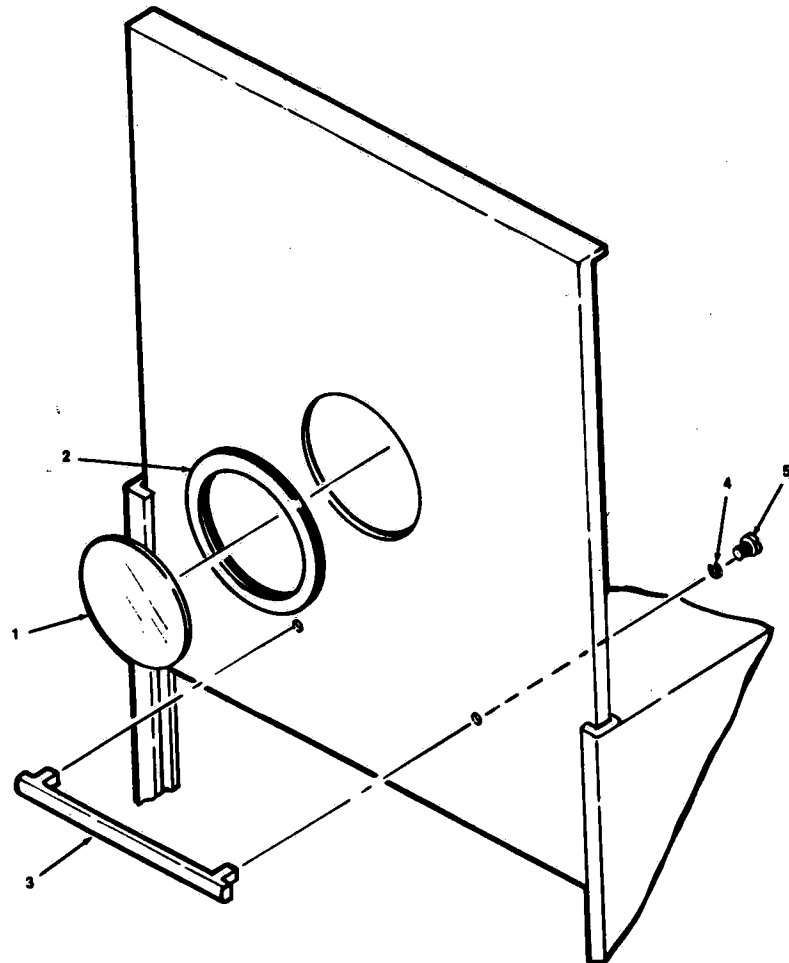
DOOR ASSEMBLY (FREESTANDING OR COUNTER-TOP MODEL).
